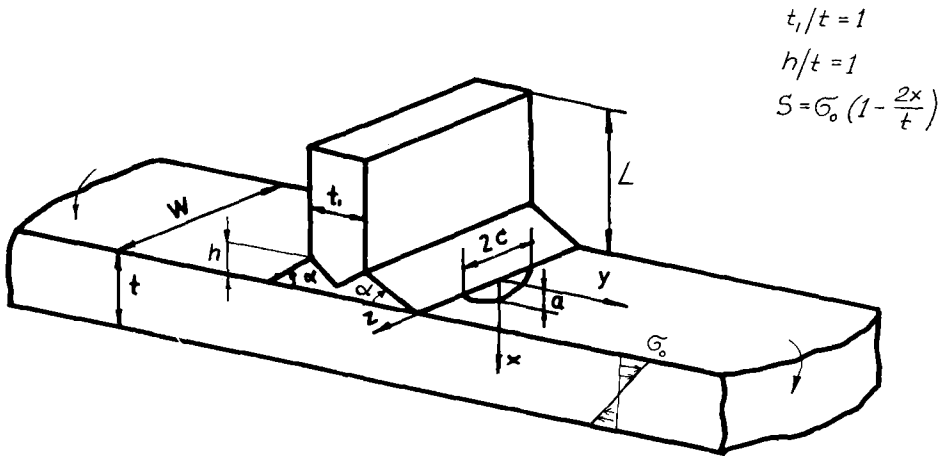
Geometry of a T-butt welded with a surface semi-elliptical crack.
